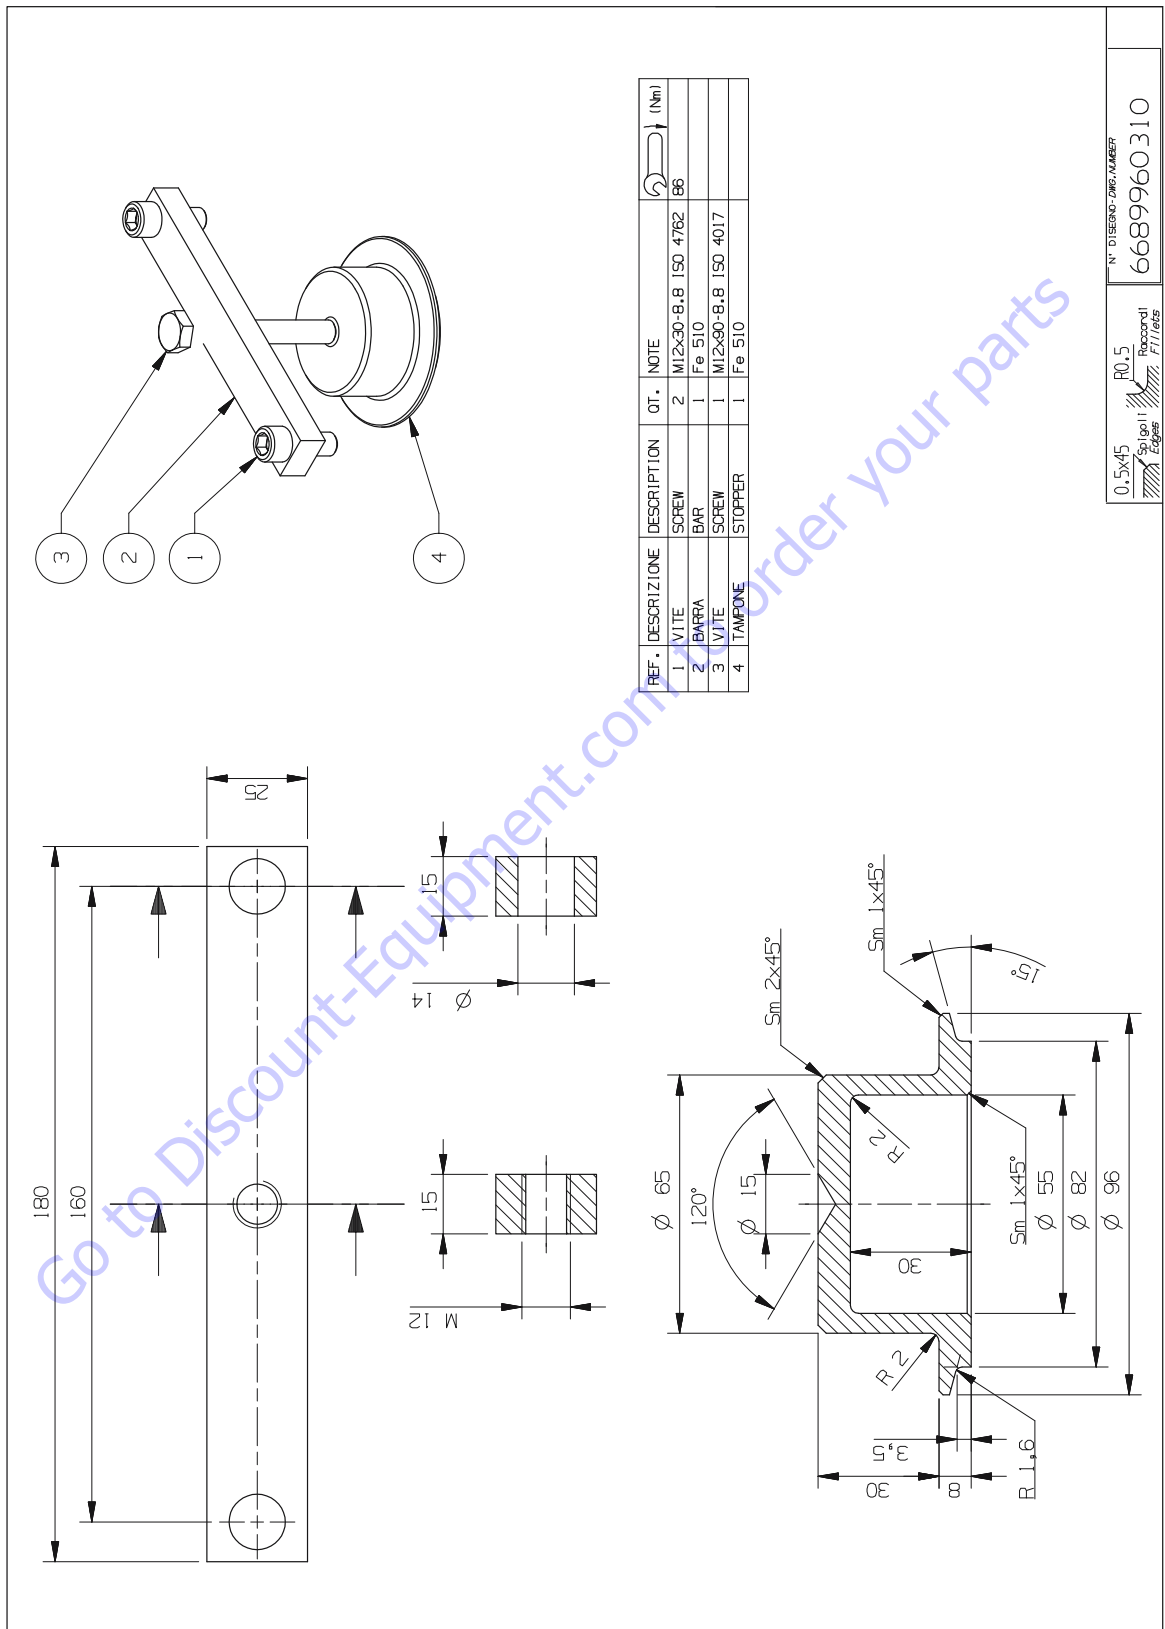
Drive Hub Special Tools - Sheet 3 of 4
